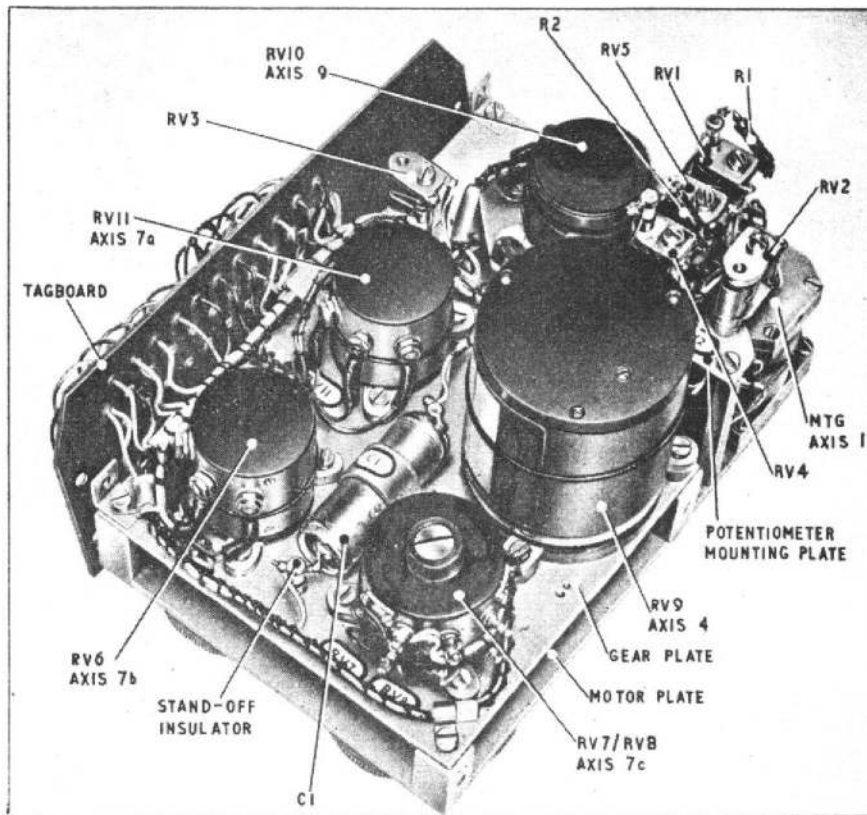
Log Mach number gearbox assembly (G1)—view A (pre-mod. ADS/104)
